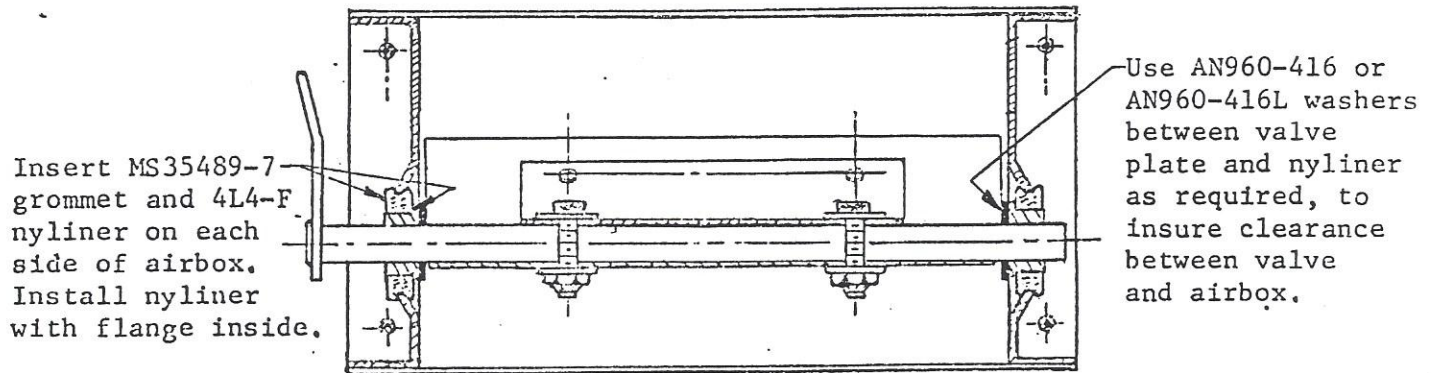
Section AA - Airbox with Valve and Bearings installed.
